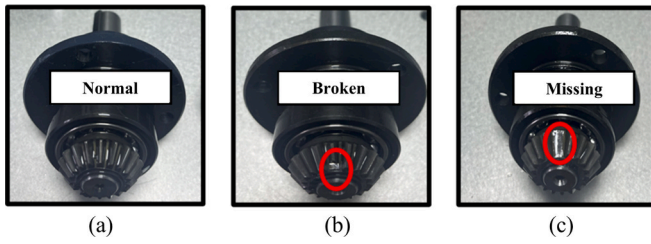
Images of different gear health conditions in the HUST Gearbox Dataset. (a) health gear, (b) gear with broken tooth, (c) gear with missing tooth.
